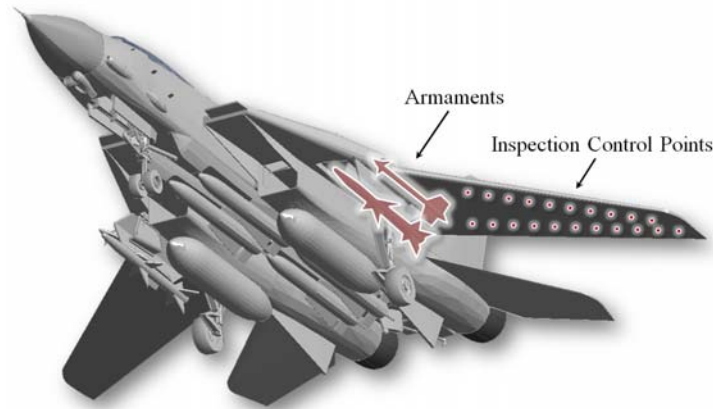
The positioning of control points comprising the motion path used to inspect the top surface of the port-side aircraft wings.
